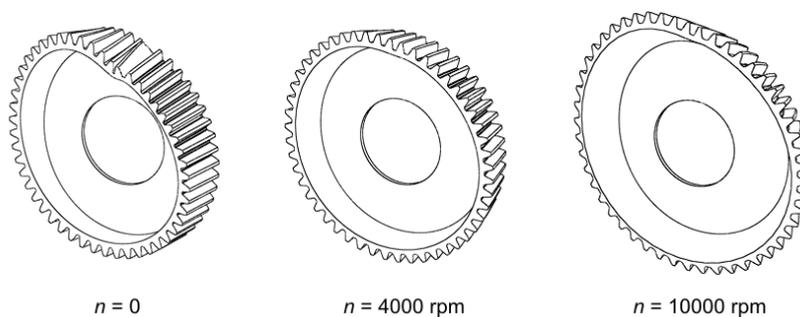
Thin-rimmed gear displacement (scaled) at 0, 4000 and 10000 rpm
